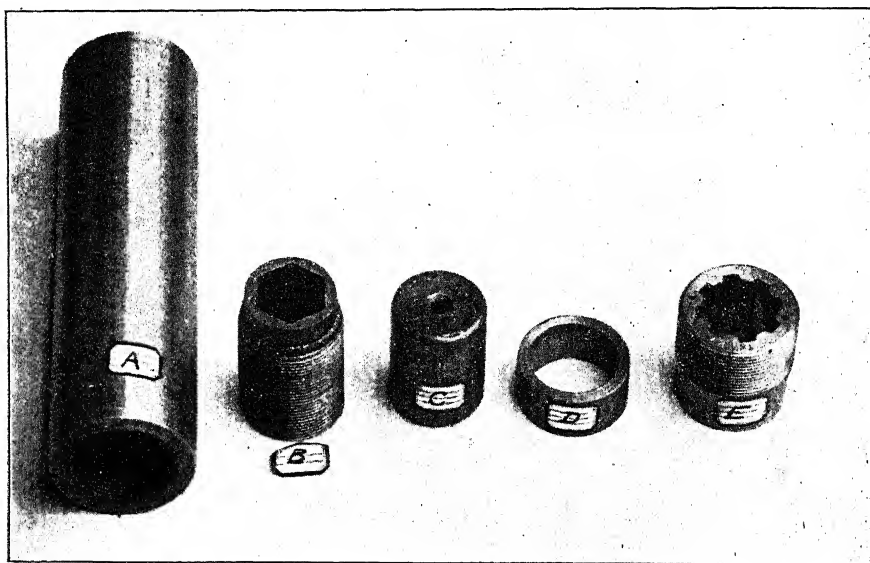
SEPARATE PARTS OF CHUCK SHOWN IN FIG. 1.
